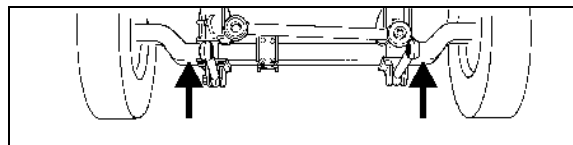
JACKING POINTS ON I-BEAM FRONT AXLE
